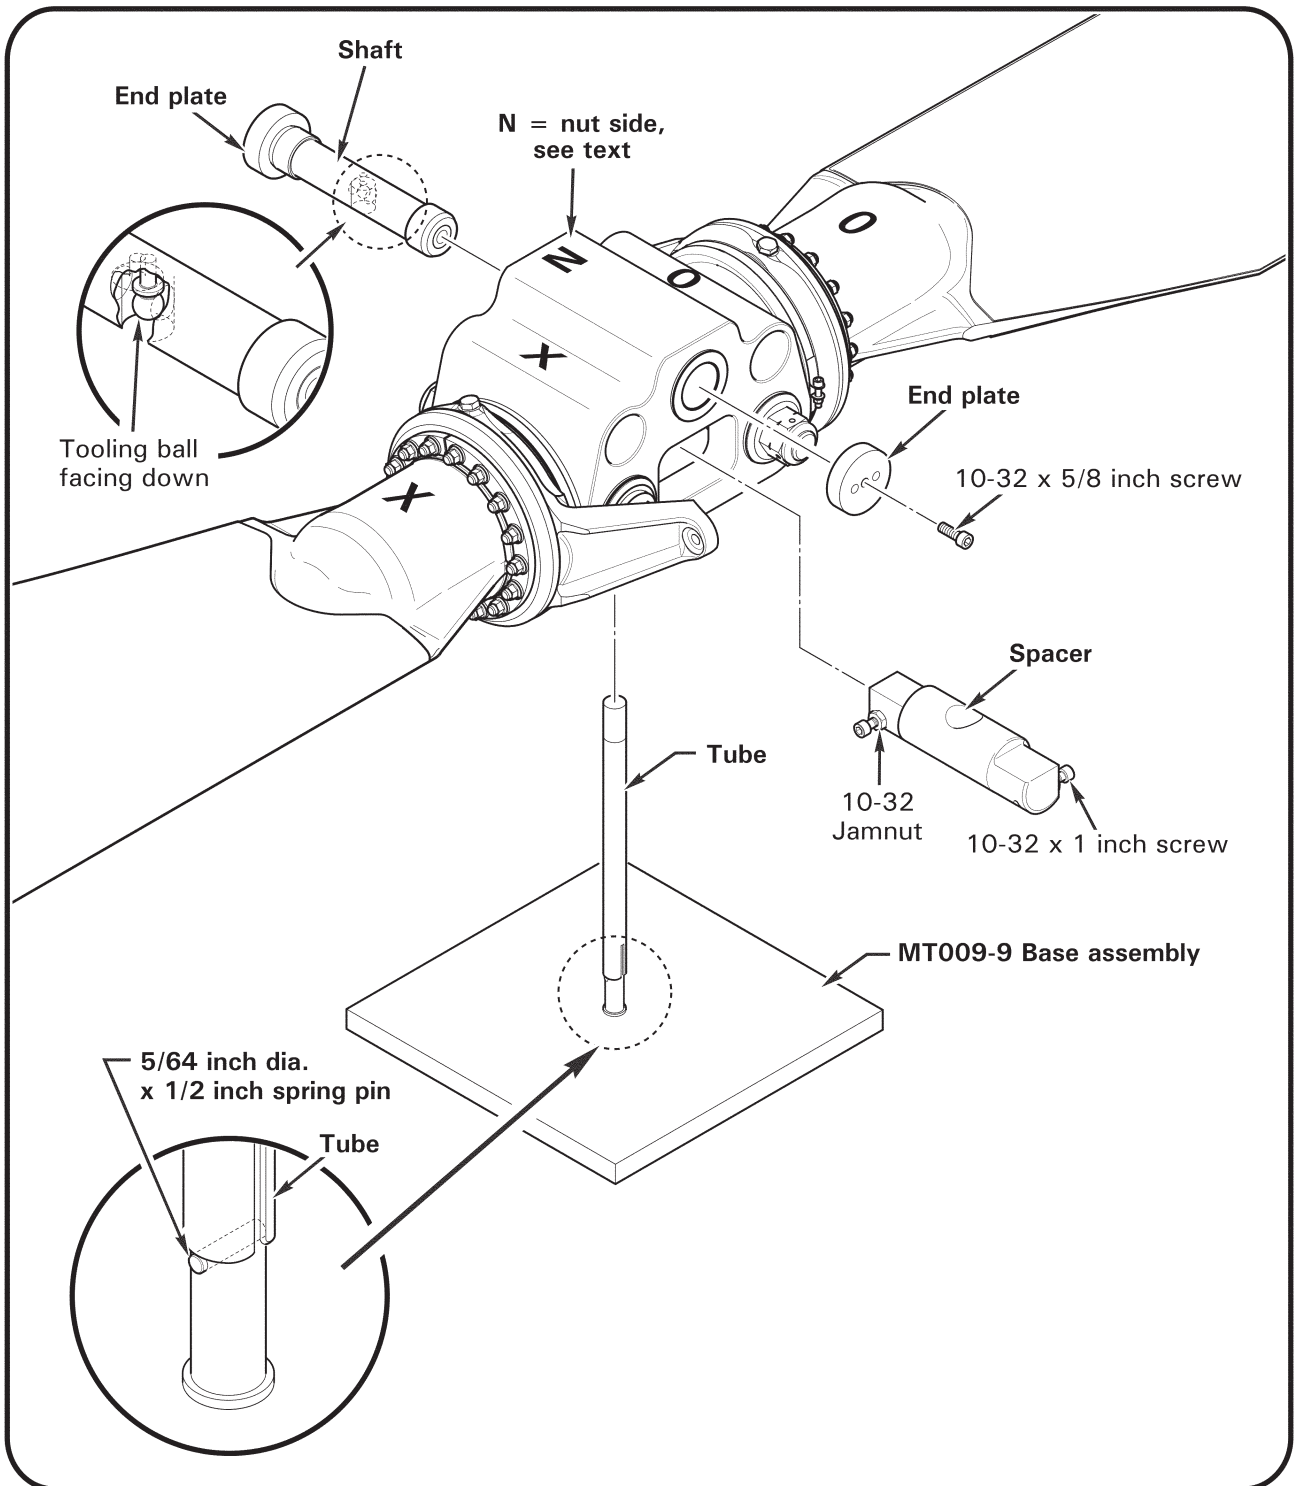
A MT524-2 MAIN ROTOR STATIC BALANCE COMPONENTS ASSEMBLY INSTALLATION
